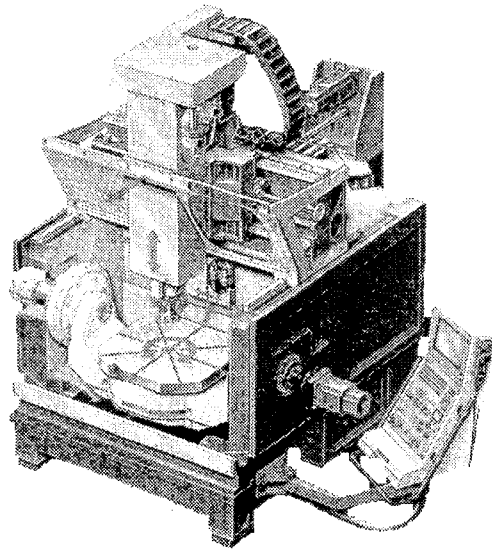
Structure of a 5-Axis Machining Center (Hermle)
